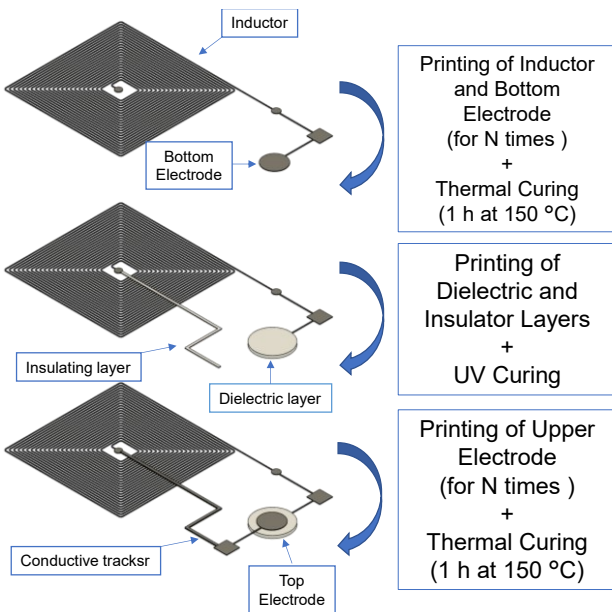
Manufacturing process for printing coil and capacitor through AJP.
